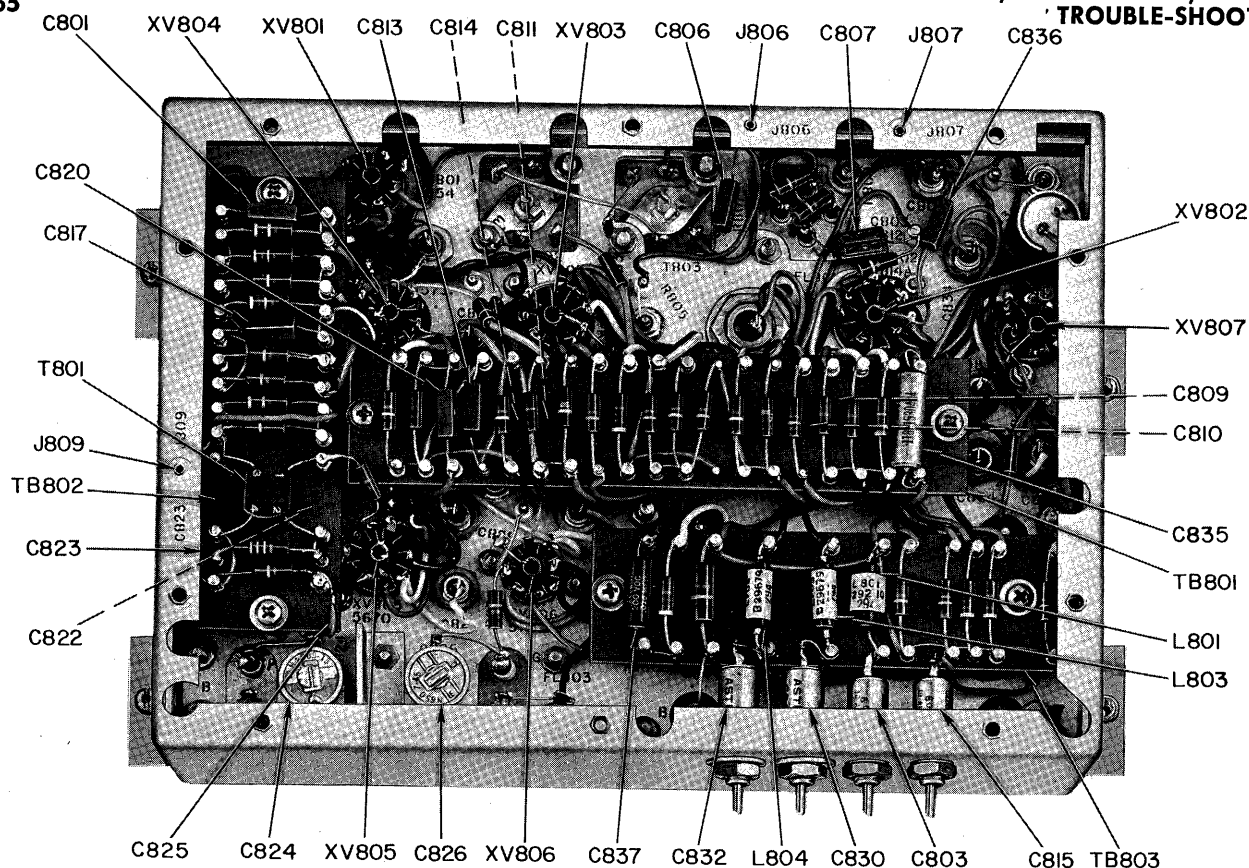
Synthesizer, Location of Parts (Sheet 2 of 2)
